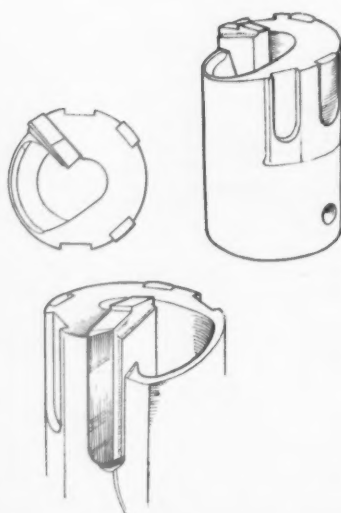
Details of the trepanning cutters. The heads are manufactured from a high-tensile steel body with a single tungsten-carbide tool bit
